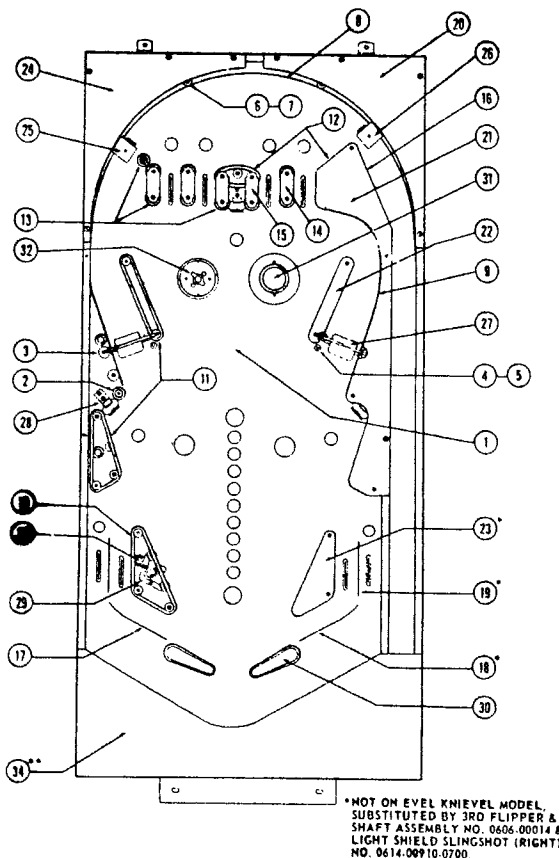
Playfield assembly and parts list (part 1 of 2).
